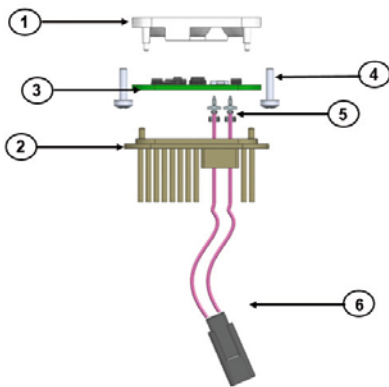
LED module consists of six blocks: 1 – lens PC Lexan LS2, 2 – heatsink AL 6063, 3 – PCB FR4 PCB, 4 – vida Ejoyt Delta, 5 – crimp CuZn33, 6 – cable FLY-R Cable 200 mm
